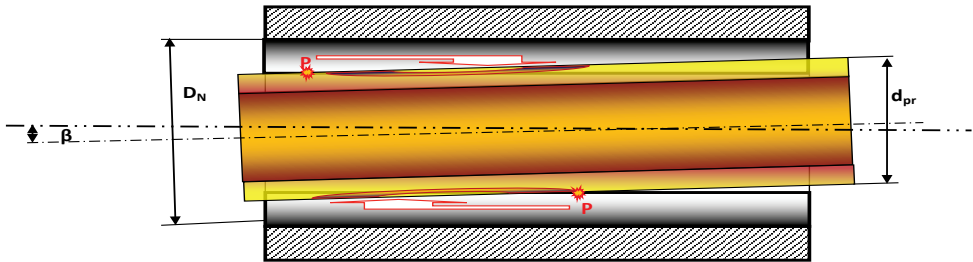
Longitudinal section of the generator shaft connection in the drive sleeve when the connection is skewed by angle β : D_N – drive sleeve inner diameter, d_{pr} – shaft diameter of a driven component, e.g., generator, P – contact point between the generator shaft tooth edge and the drive sleeve tooth edge – the arrow indicates this point's movement direction, i.e., concentration of abrasive forces R at the contact edge of the SPLINES
